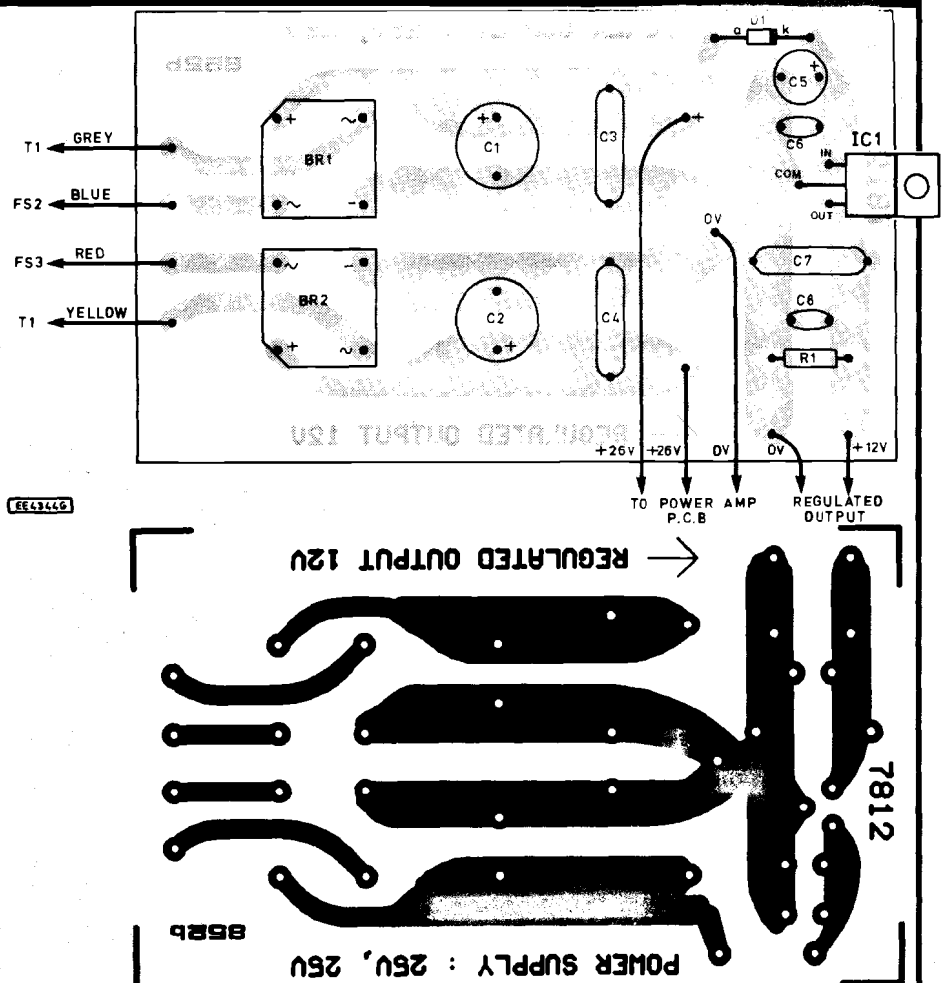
System Power Supply printed circuit board component layout and full size underside copper foil master pattern.
